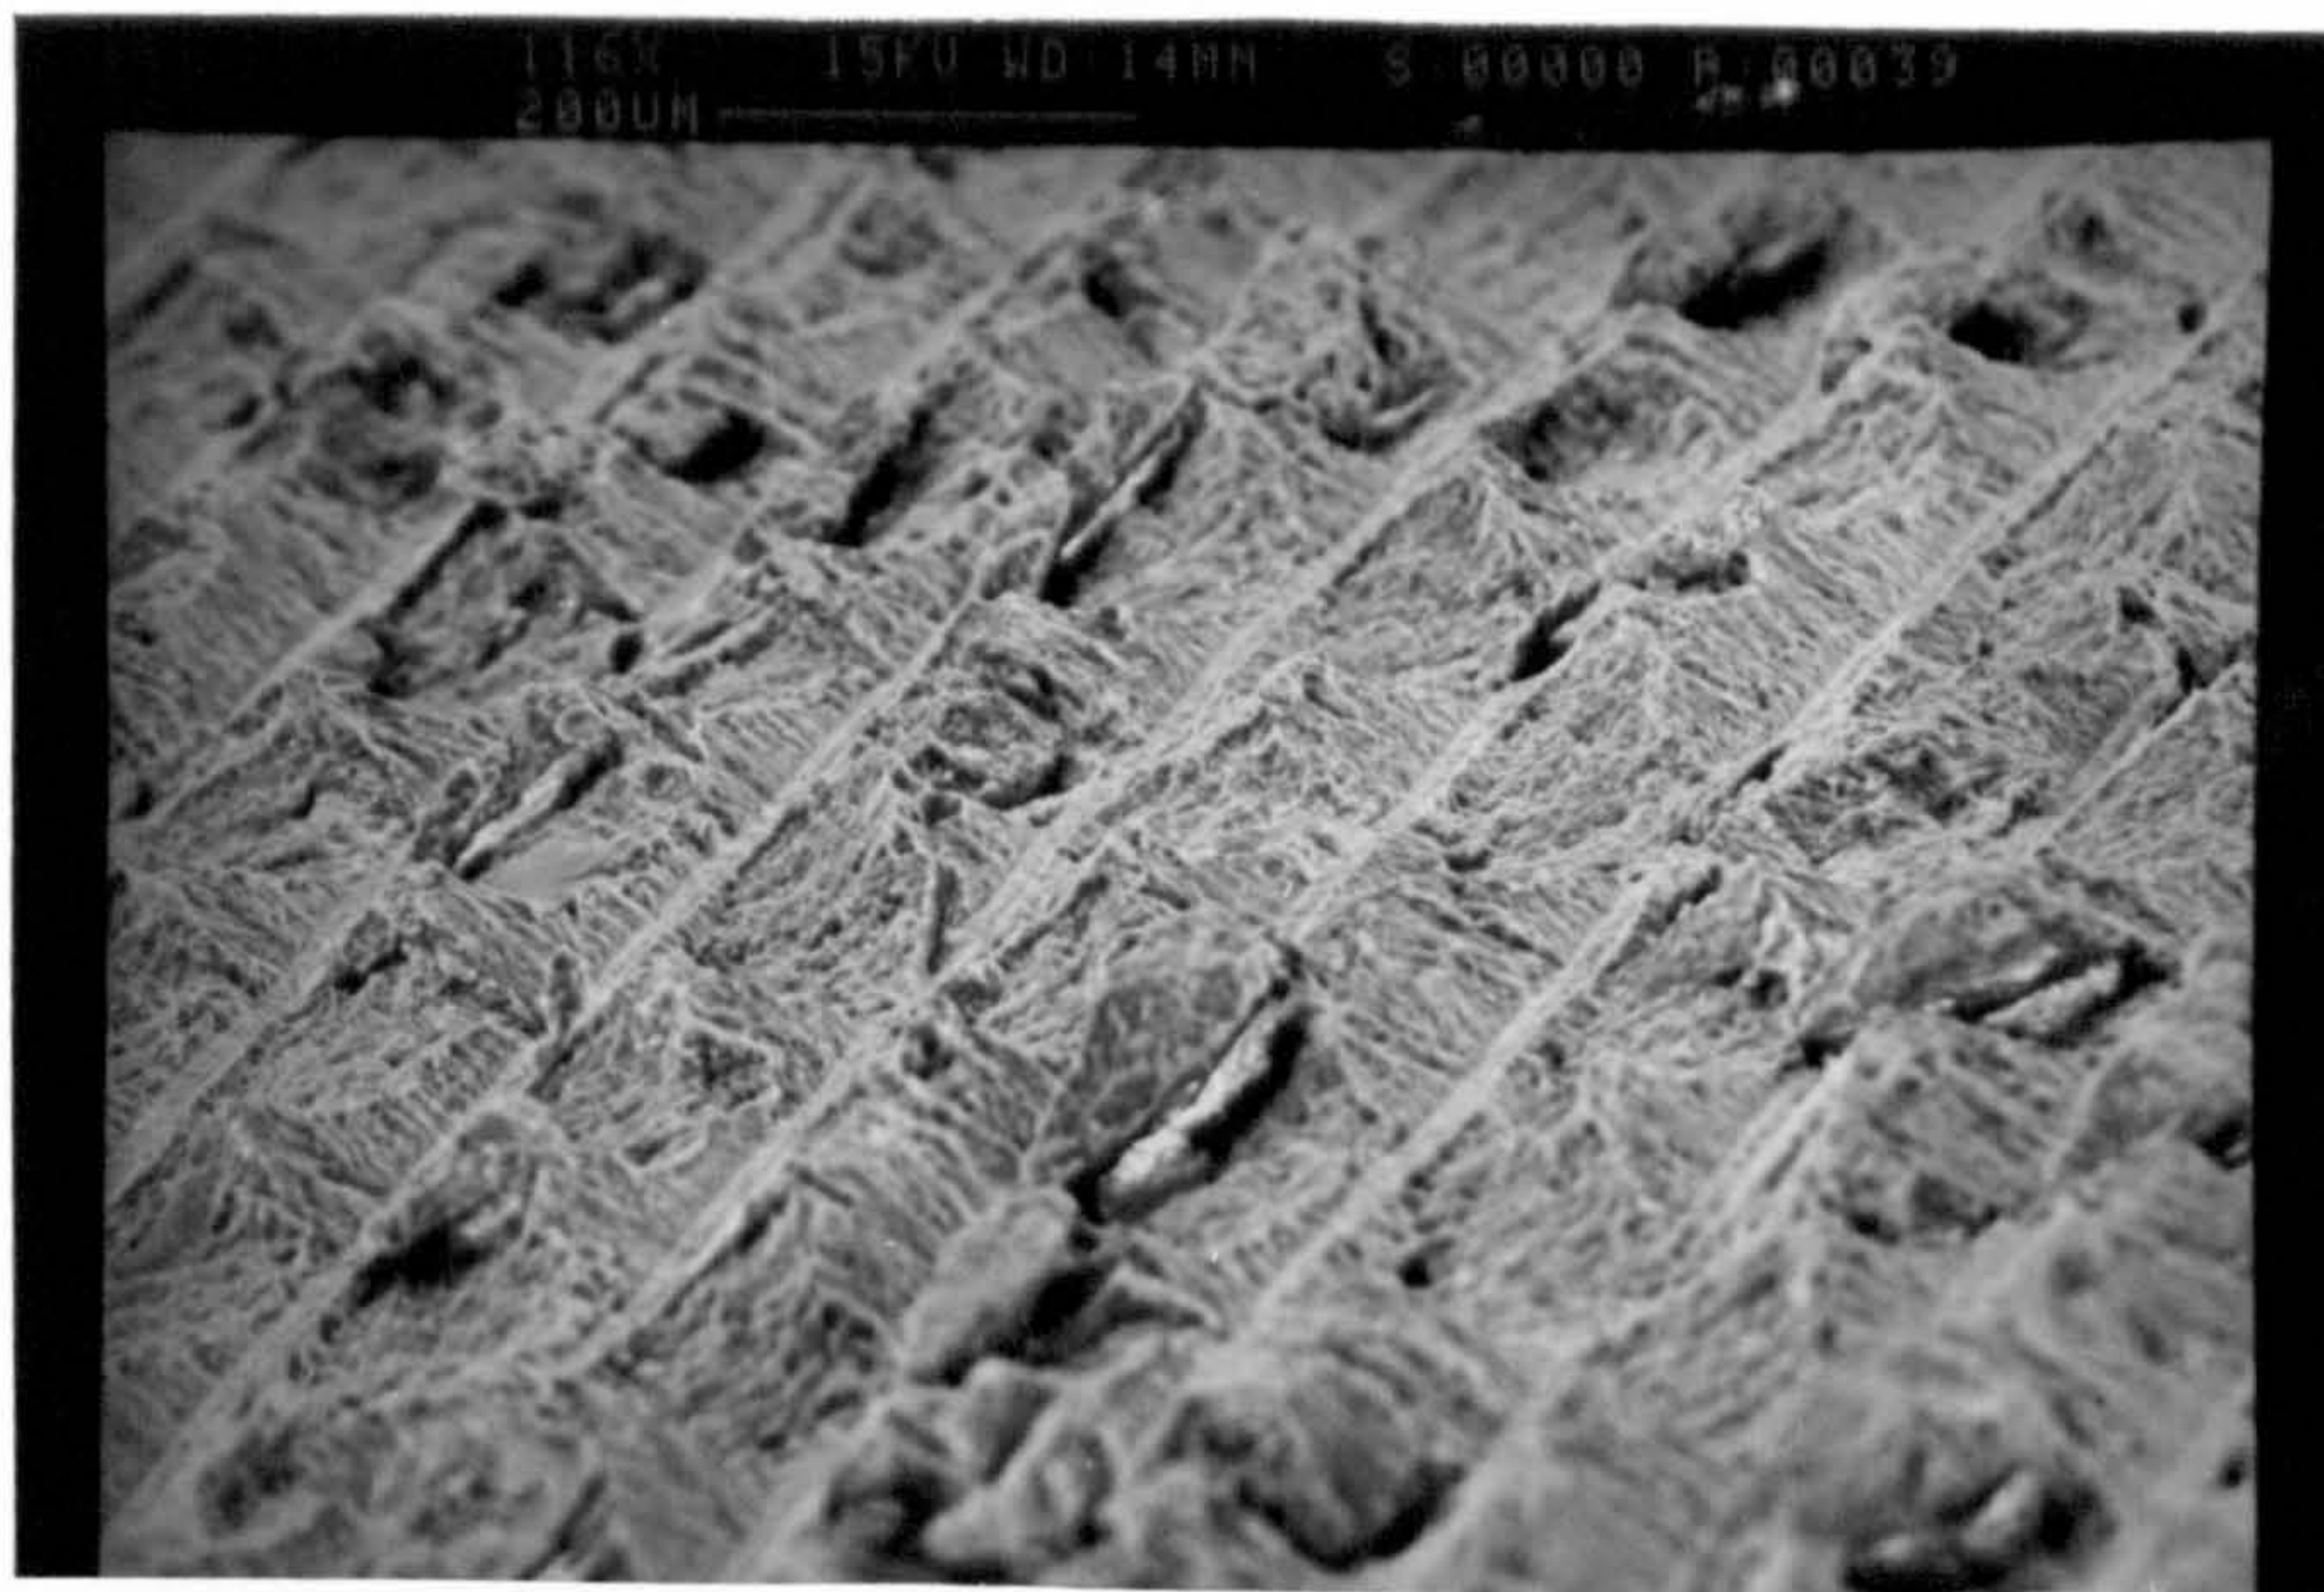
PVC machined surface produced at high cutting speed (250 m/min), suggesting discontinuous chip formation. (Rake angle =  $30^\circ$ , feed = 0.16 mm/rev)
